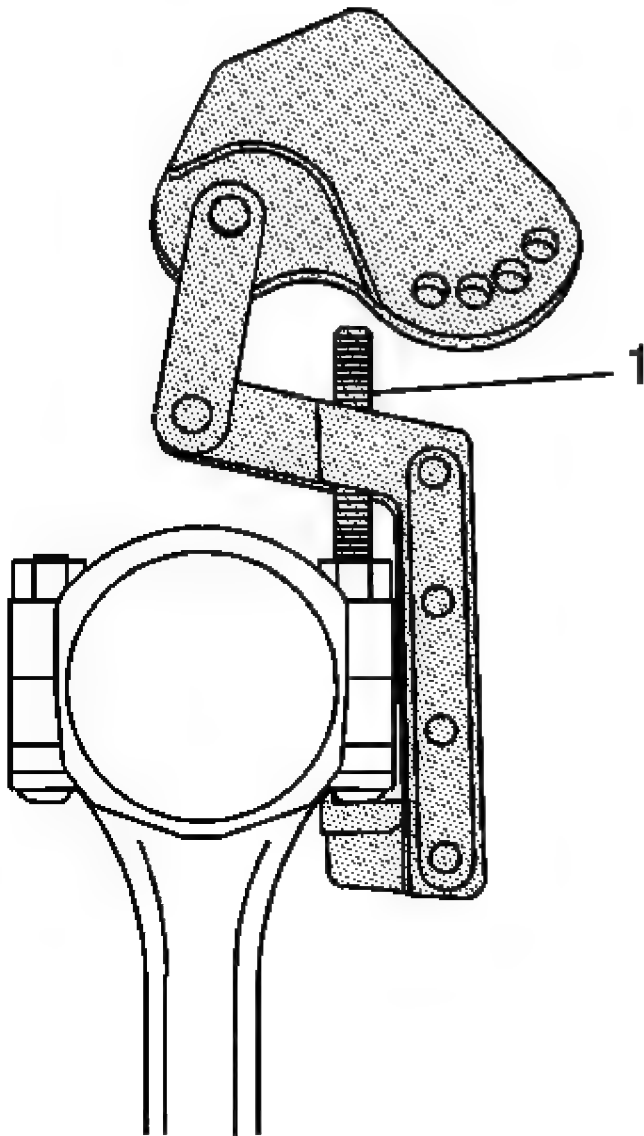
Positioning Foot Of Pivot Arm Assembly
